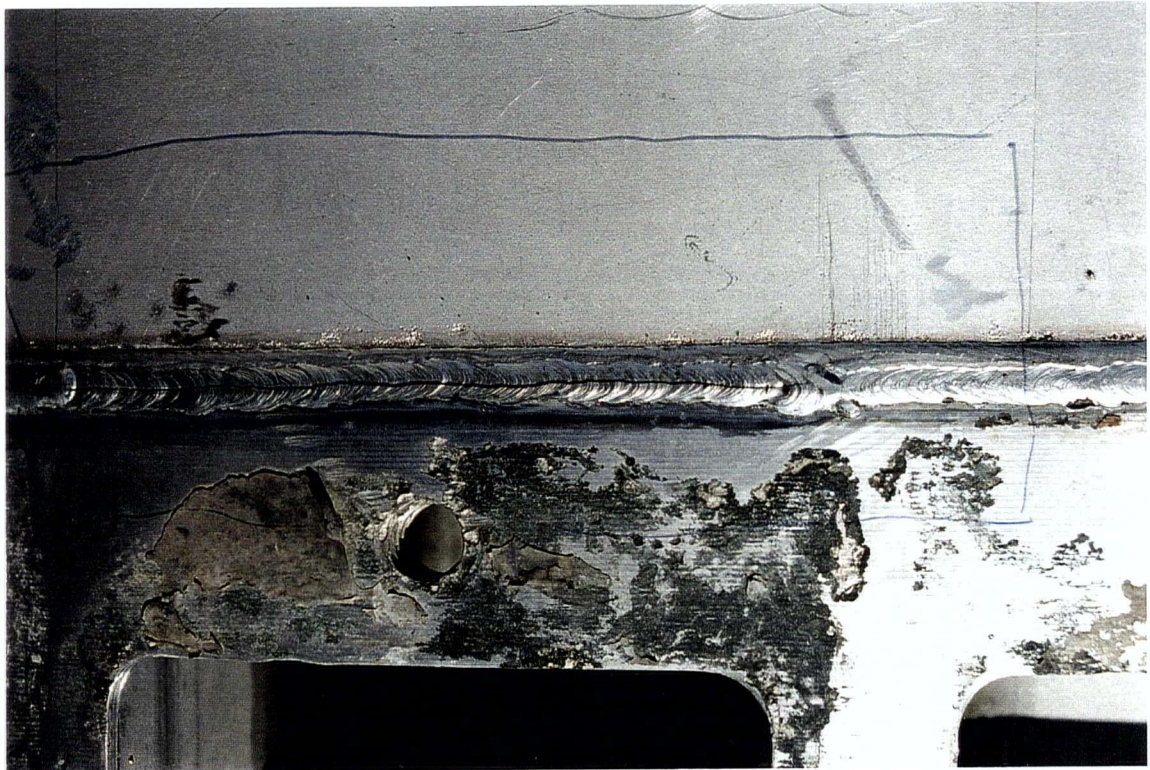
Typical Crack in the Circumferential Weld Seam
